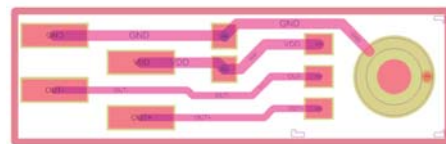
EV_ICS-40720-FX Board Layout (Top View)
